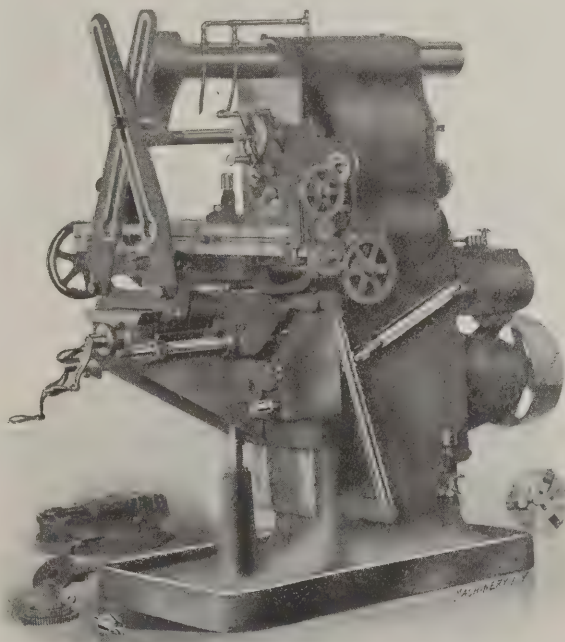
Right-hand Side of Universal Miller, showing Oiling Arrangement and Spiral Head.
